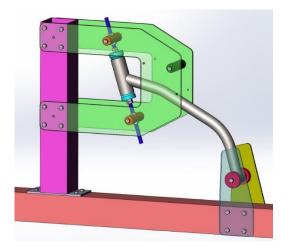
Front part of first stage frame jig, locating headtube and bottom bracket, solid model.
